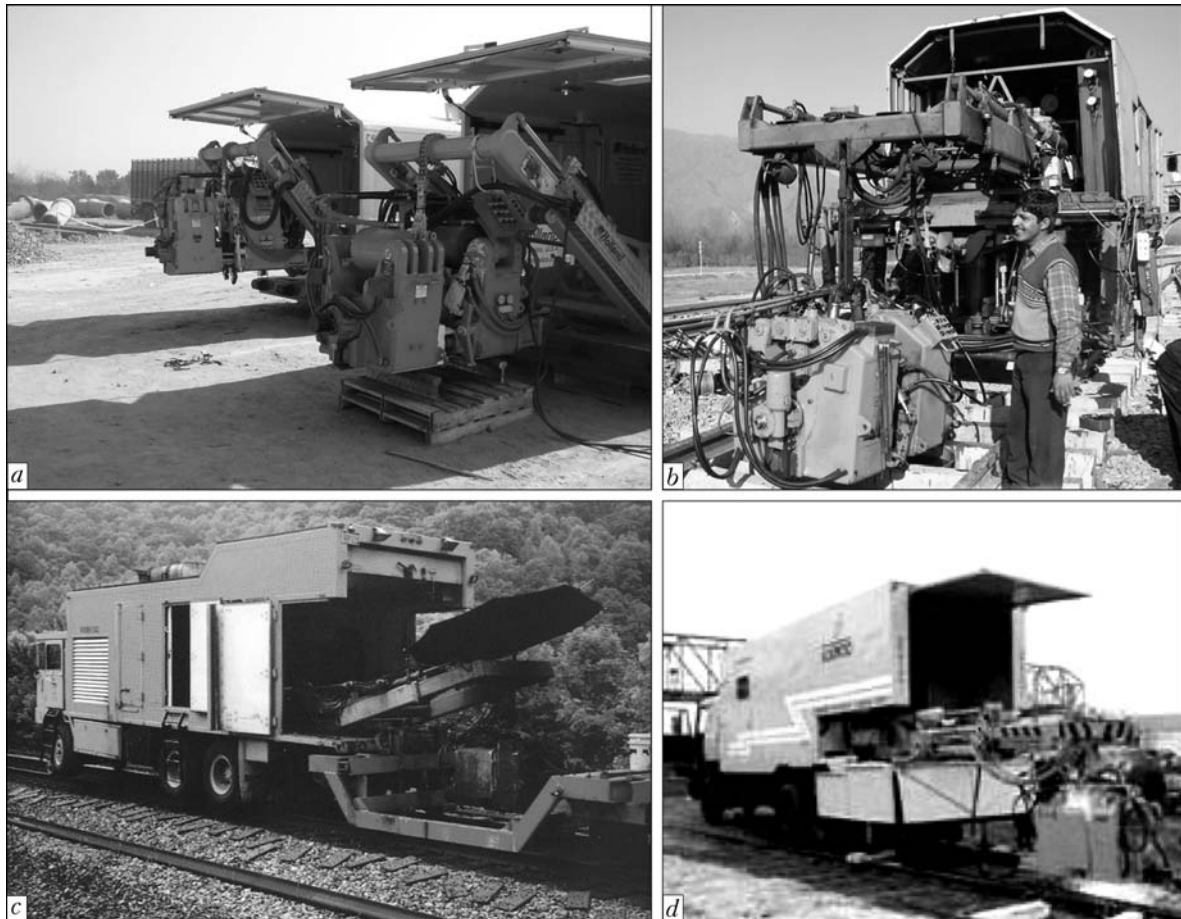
Mobile rail welding complexes: *a* — «Holland»; *b* — «Plasser»; *c* — «Norfolk»; *d* — KSM 005
